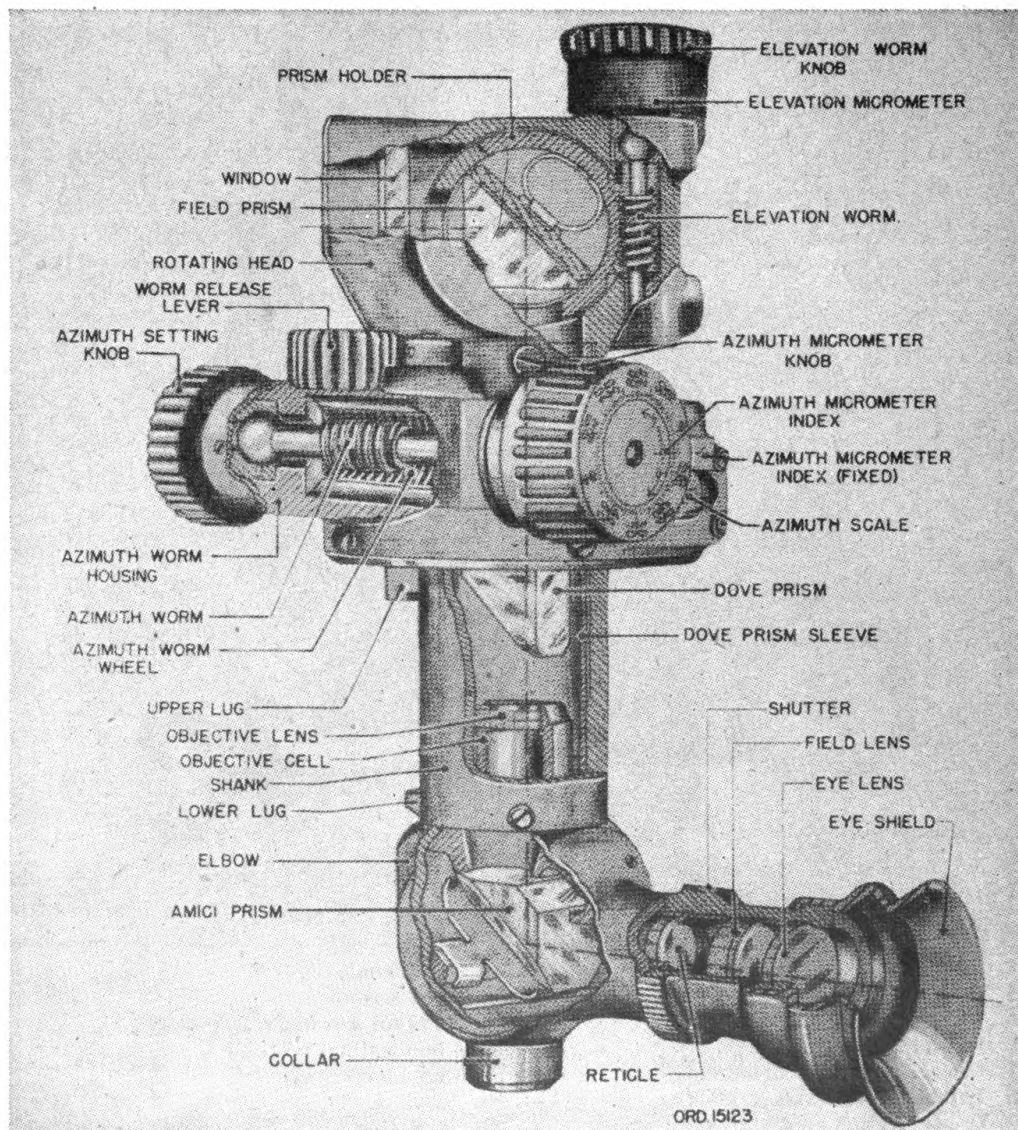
Panoramic telescope M5A3, cutaway sections.
